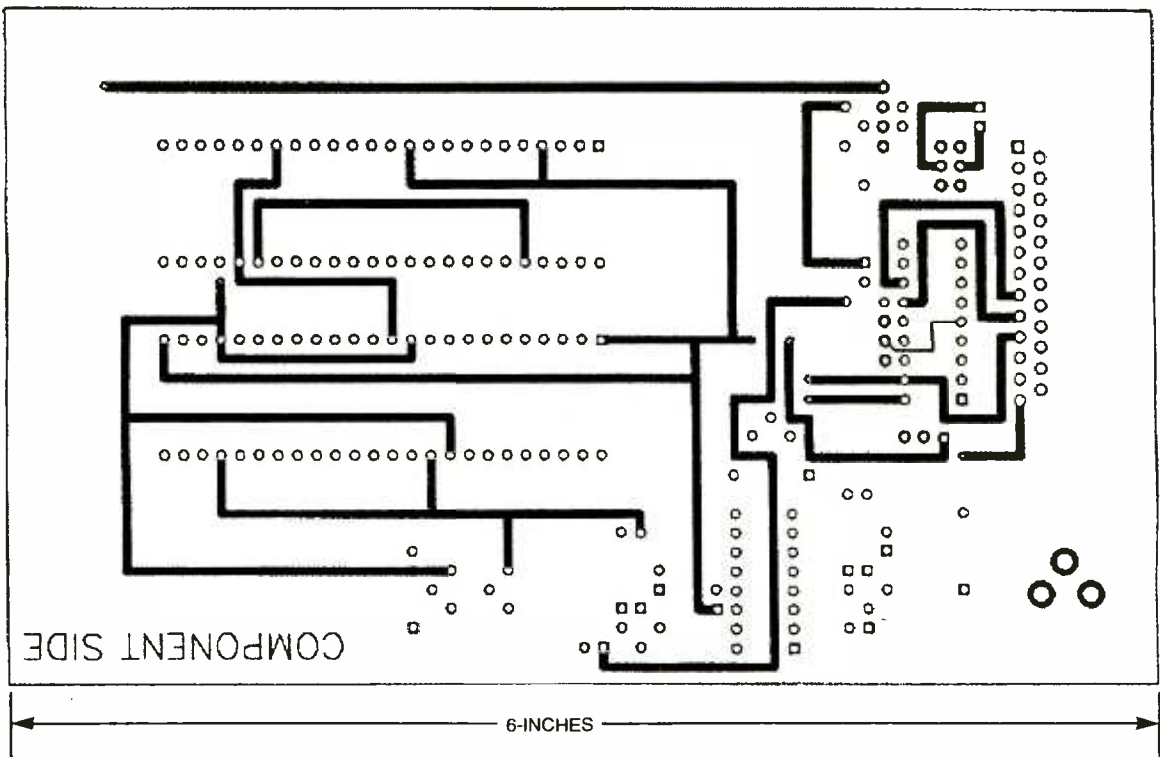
Although the PIC Replicator can be built on a piece of perfboard, a PC board makes for a more robust unit while reducing wiring errors.
